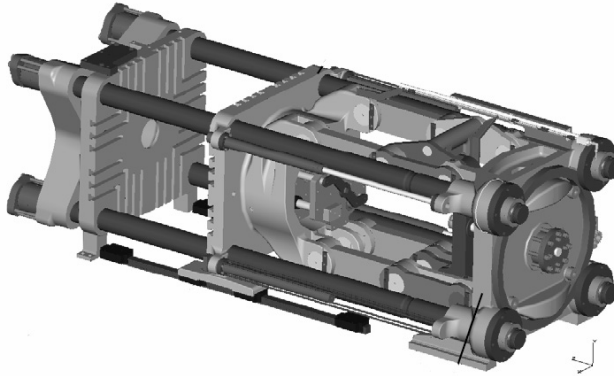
Construction of mould and toggle mechanism in HSIM machine
